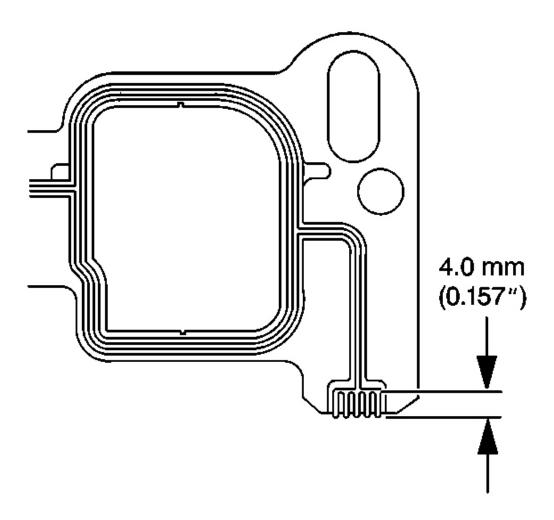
Applying Patch Of Adhesive To Cylinder Head Side Of Intake Manifold
